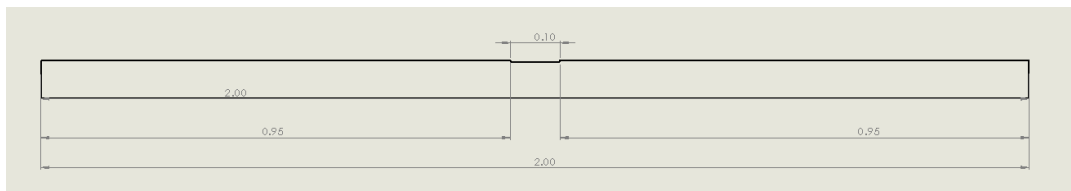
(b) Artificial Cracked Straight Pipe Dimension
